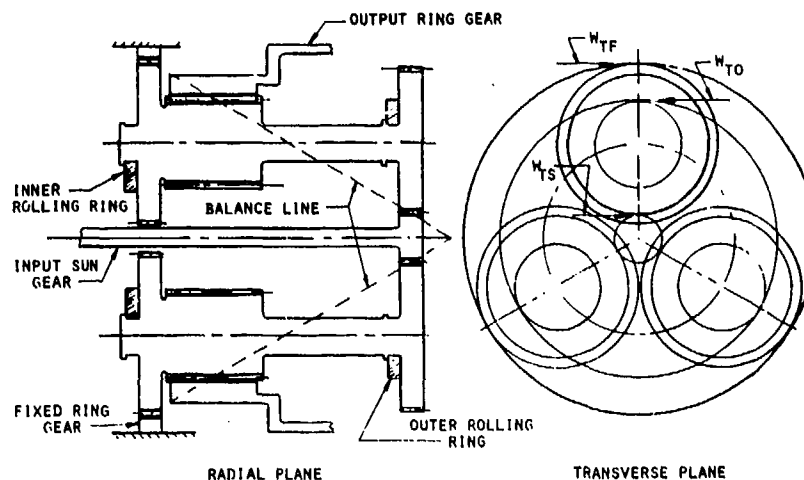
Schematic arrangement of self-aligning, bearingless, planetary gear - radial and transverse planes.
